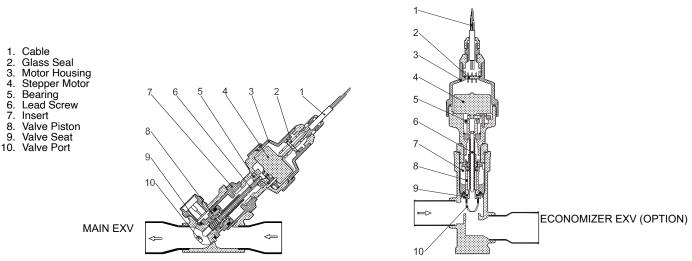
Cutaway Views of Electronic Expansion Valves (EXV) (P Compressor Only)
